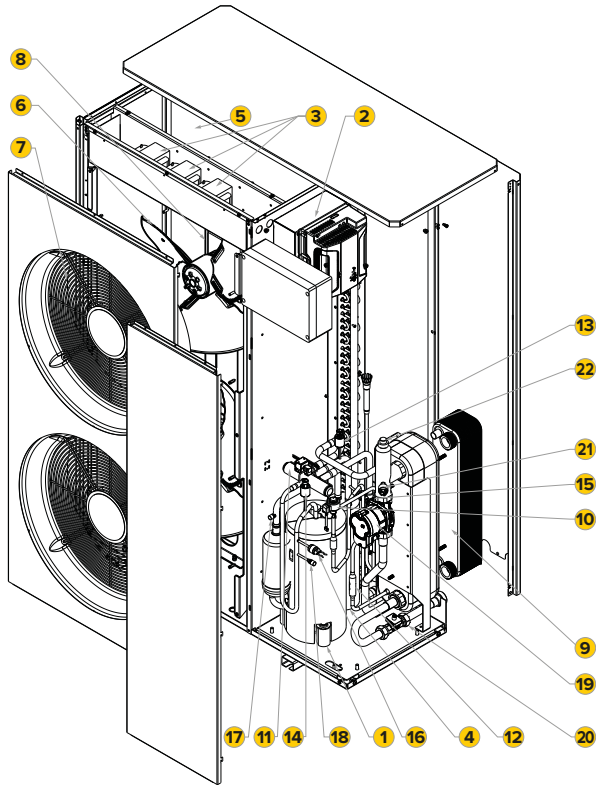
Design of the ZHHH-01-15K-R290-R5-M heat pump outdoor unit
